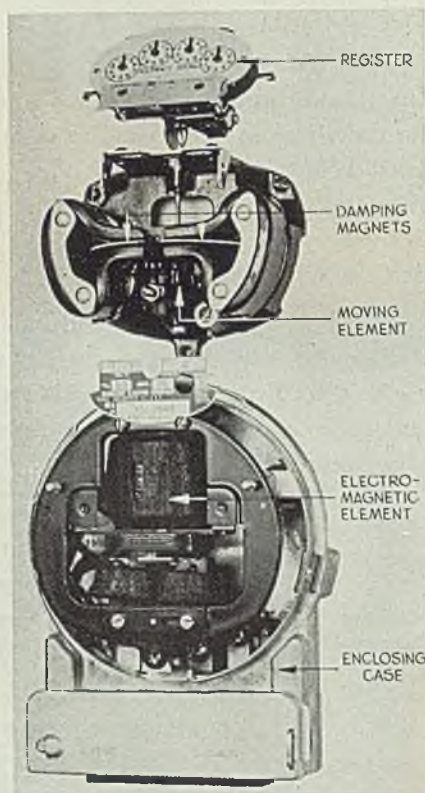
Parts and subassemblies going into the makeup of household watt-hour meter
